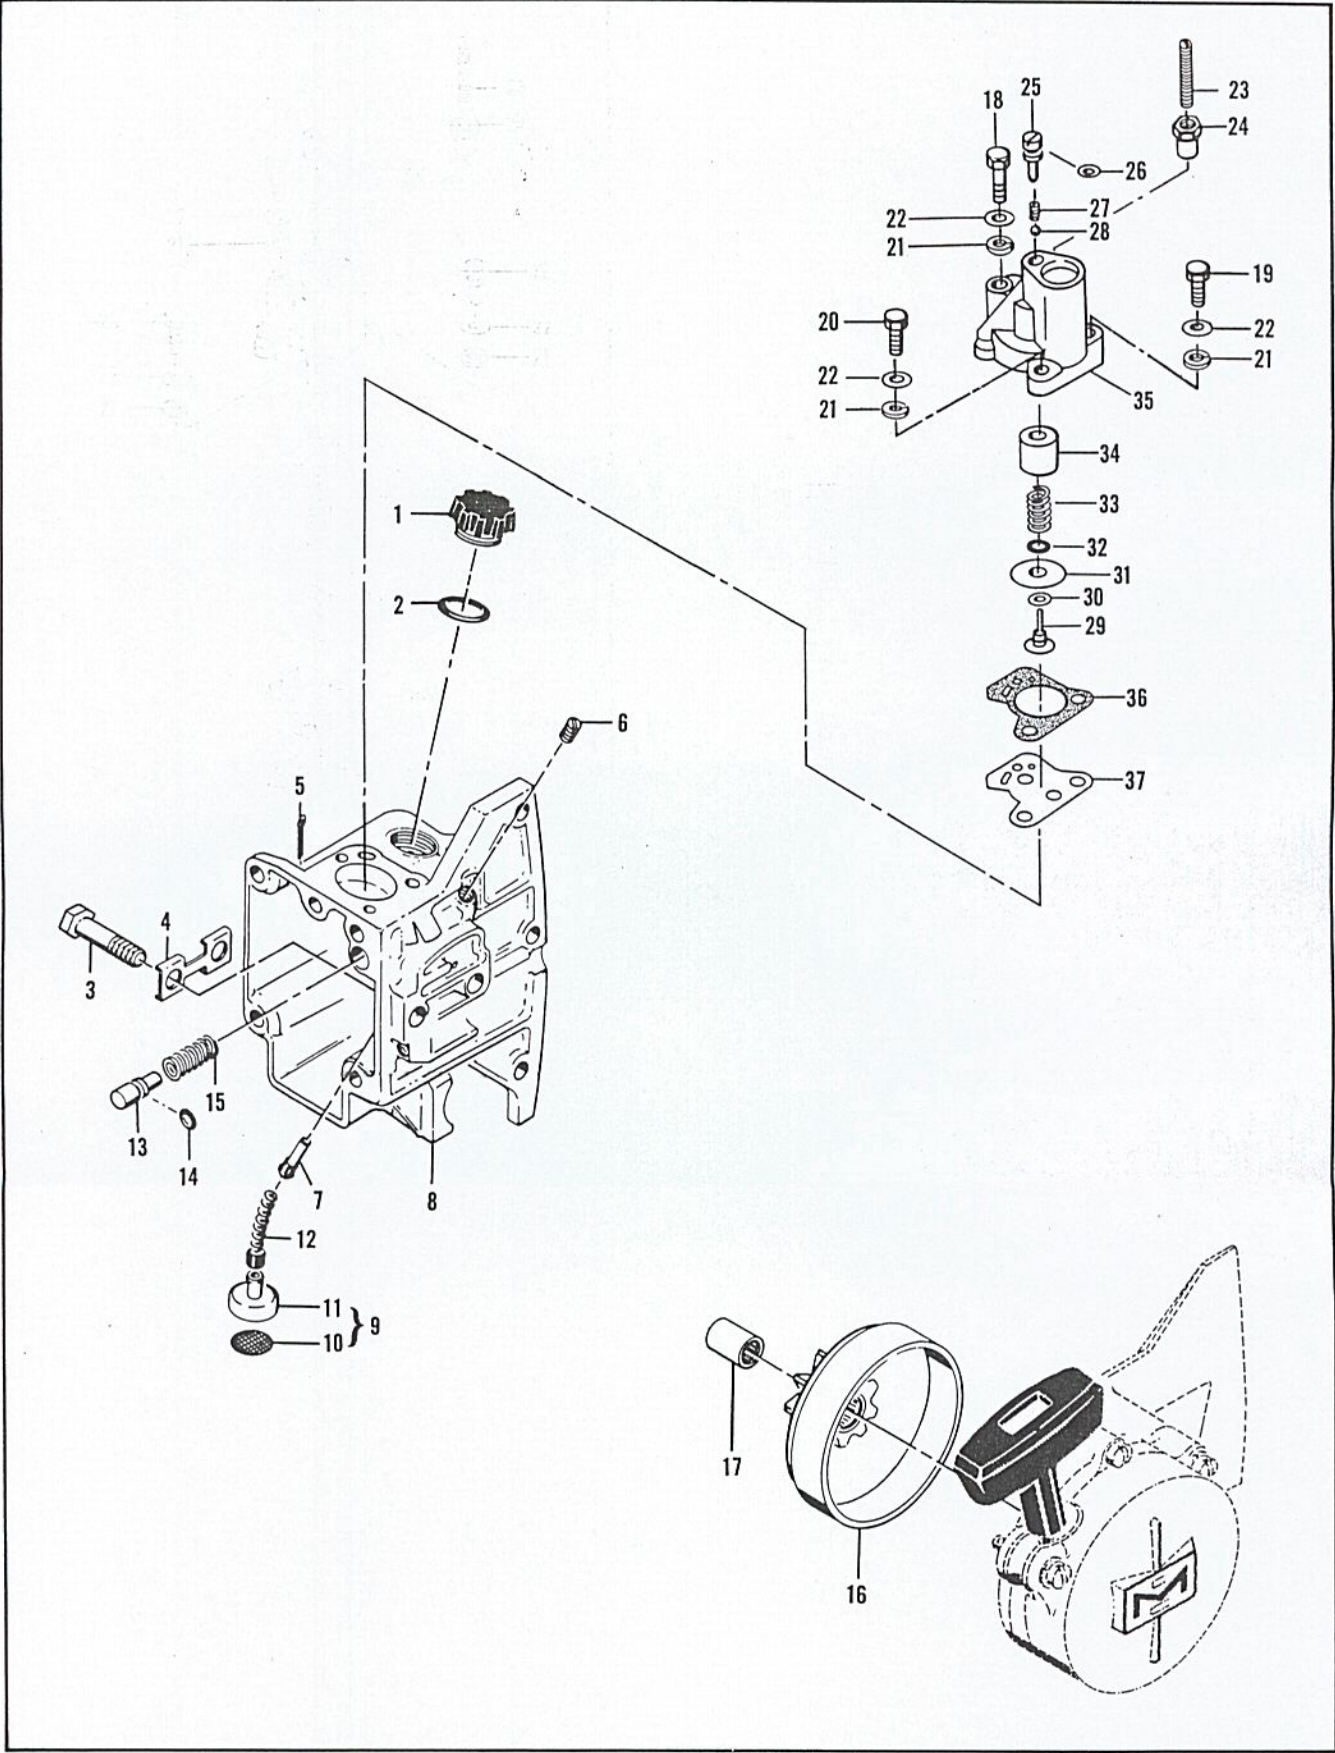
Oiler Housing, Sprocket, Clutch Drum and Bearing Assemblies
